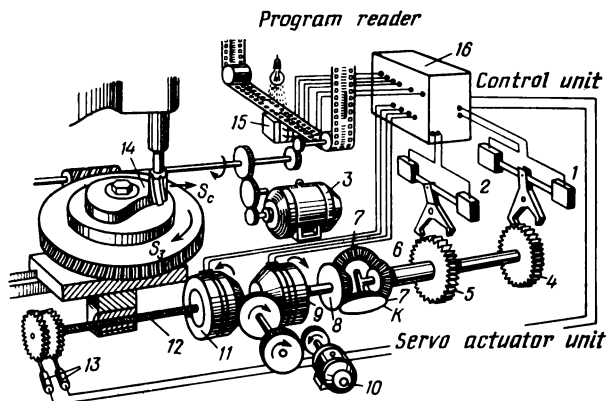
Sketch of a numerically controlled vertical milling machine
